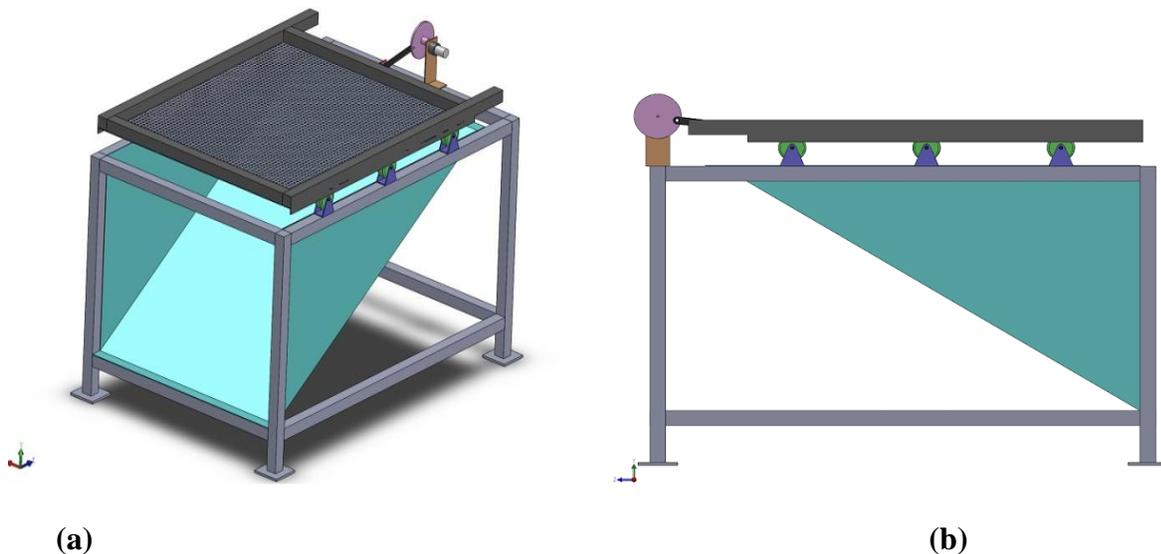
(a) and (b) 3D and 2D view of sand sieving machine.
